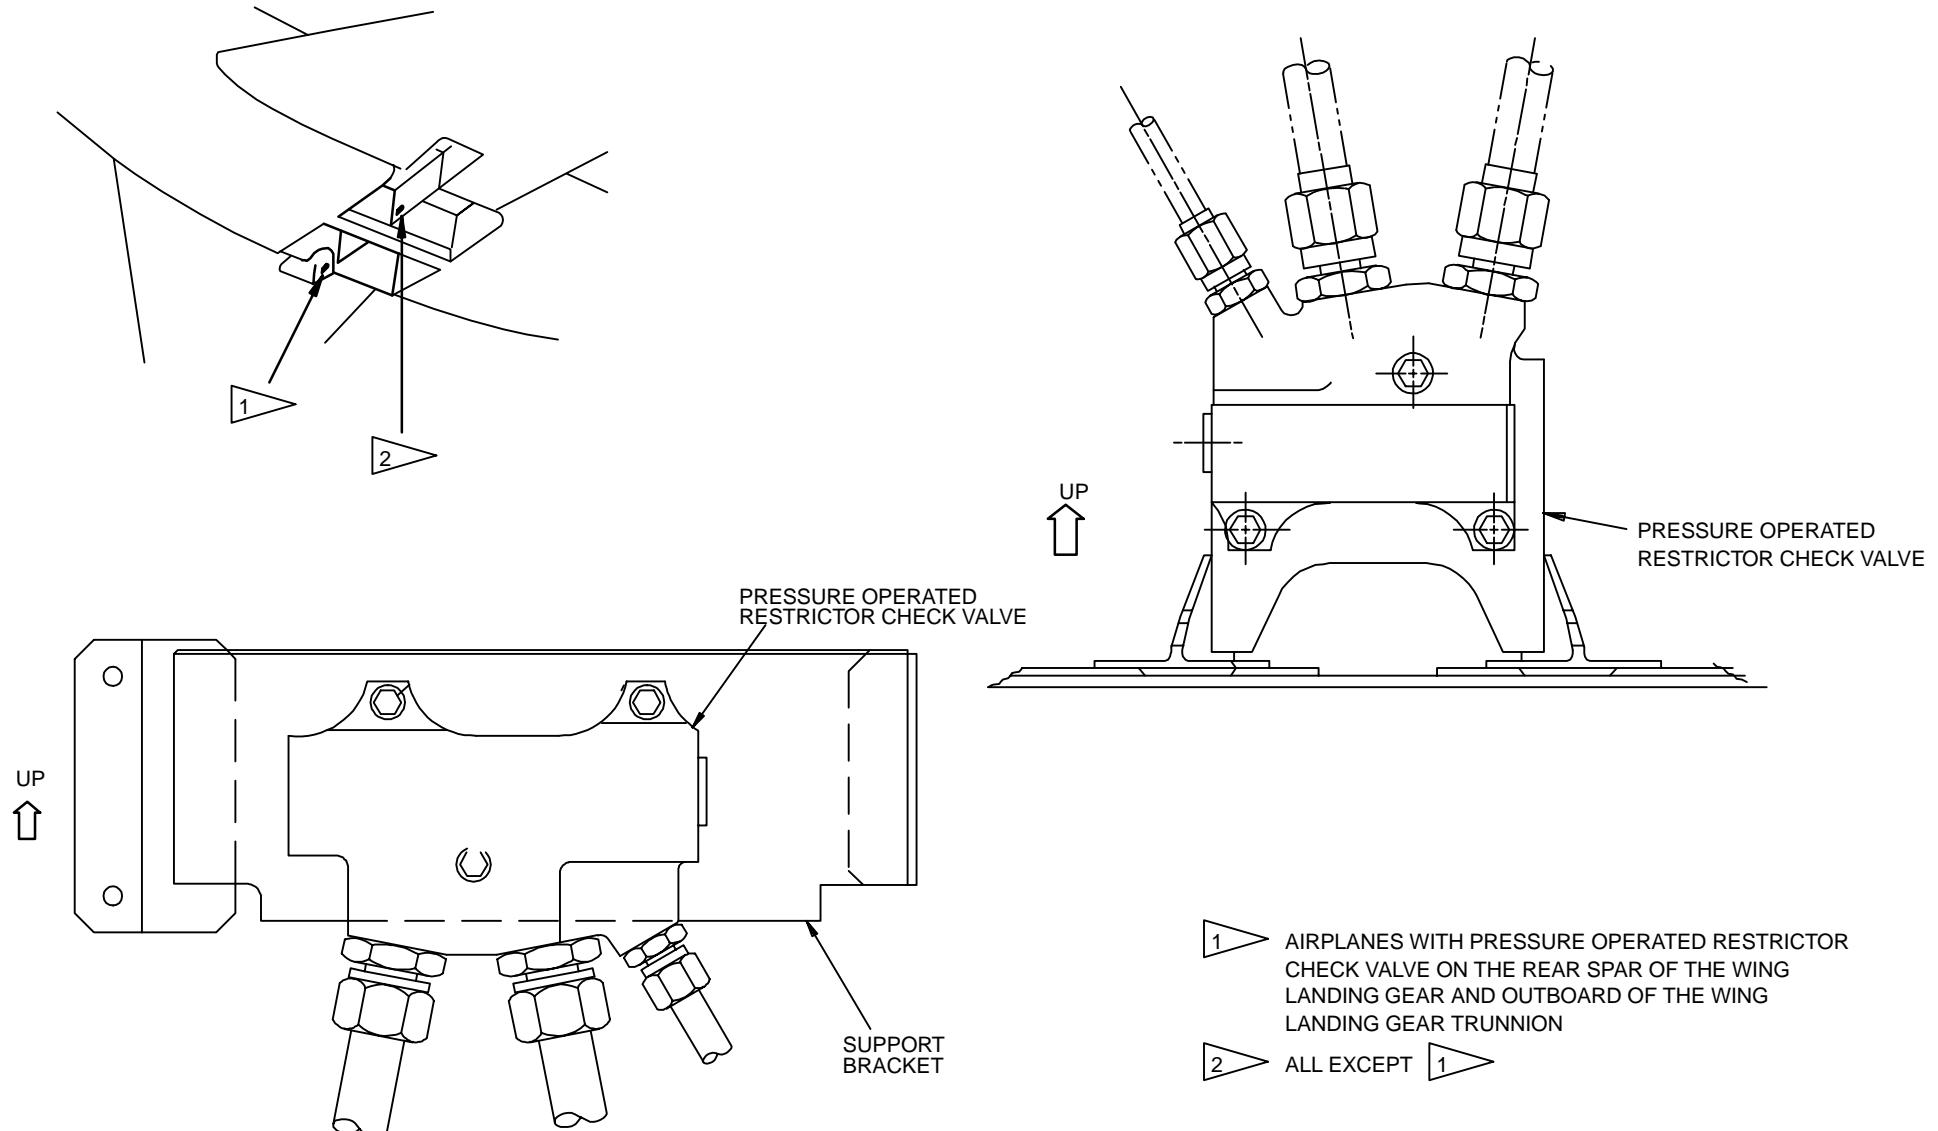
WING GEAR PRESS OPERATED RESTRICTOR CHECK VALVE
